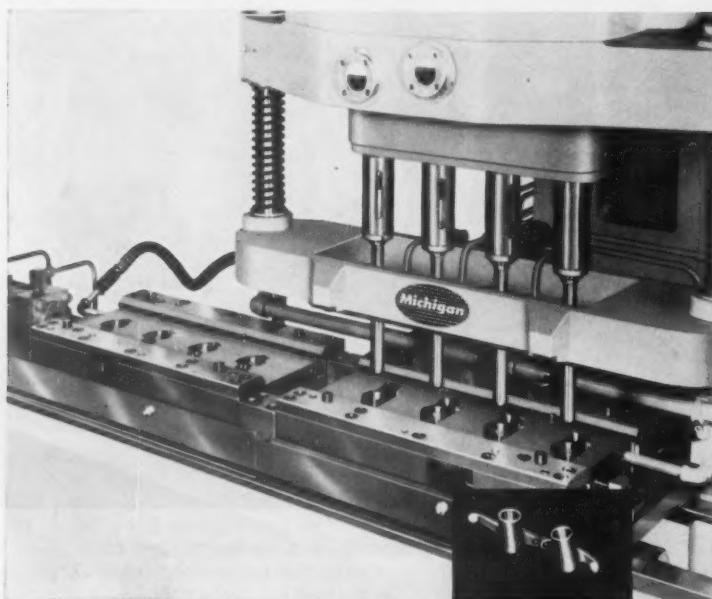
Shuttle type fixture designed and equipped for reaming operations on rocker arms
